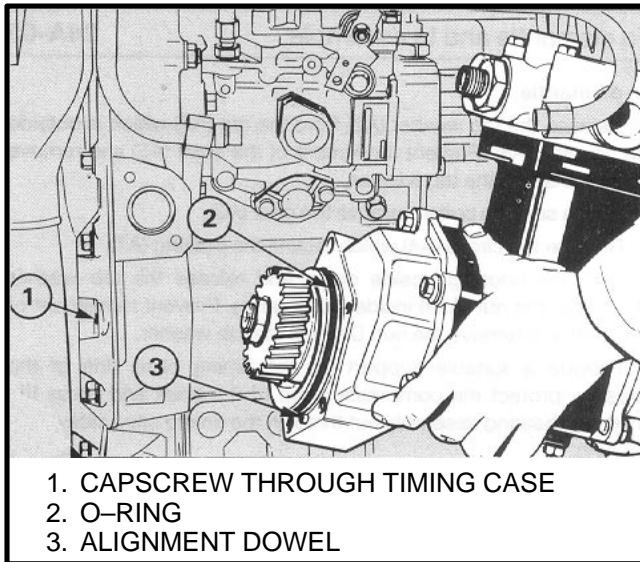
AIR COMPRESSOR REMOVAL AND INSTALLATION, WABCO
